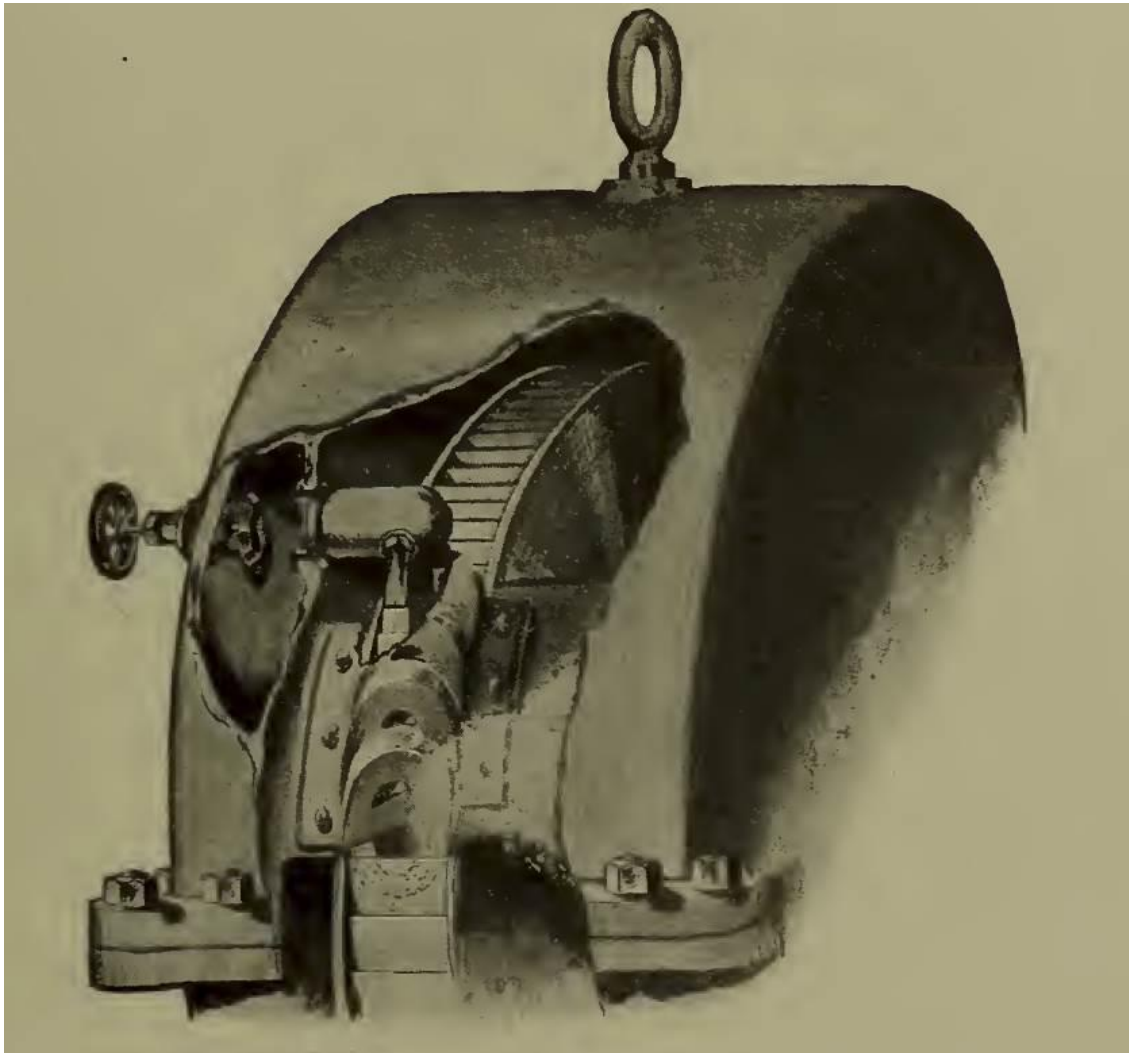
Terry turbine, with steam injection nozzle and reversing chambers.²
